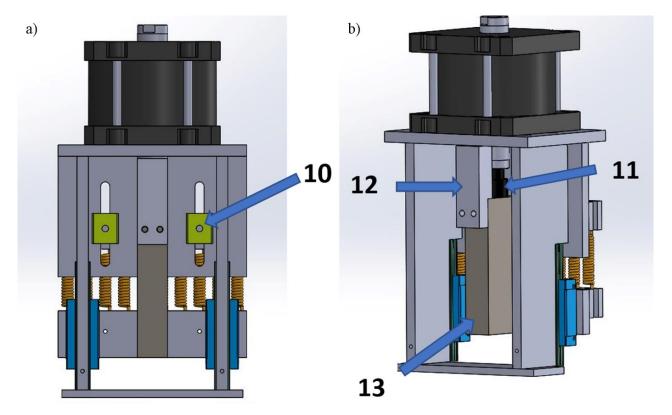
Design of fatigue machine from a) back side and b) a detail view (Yorulma makinesinin a) arka tarafından tasarımı ve b) detay görünümü)
